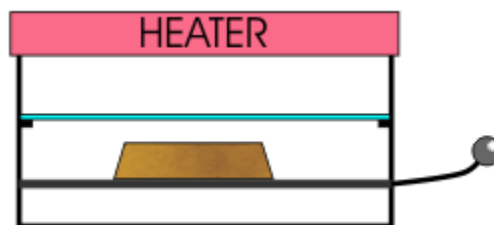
Mold placed inside vacuum former with plastic sheet above, used with permission from [15].
